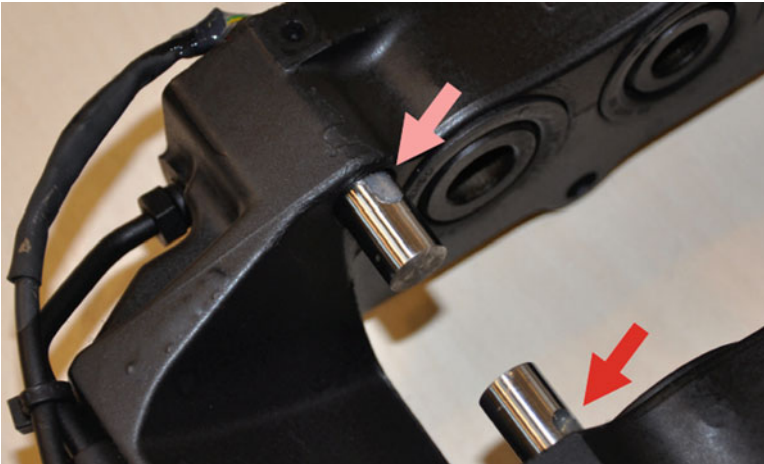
Brake calliper with modified guide pins, strain gauges *marked
